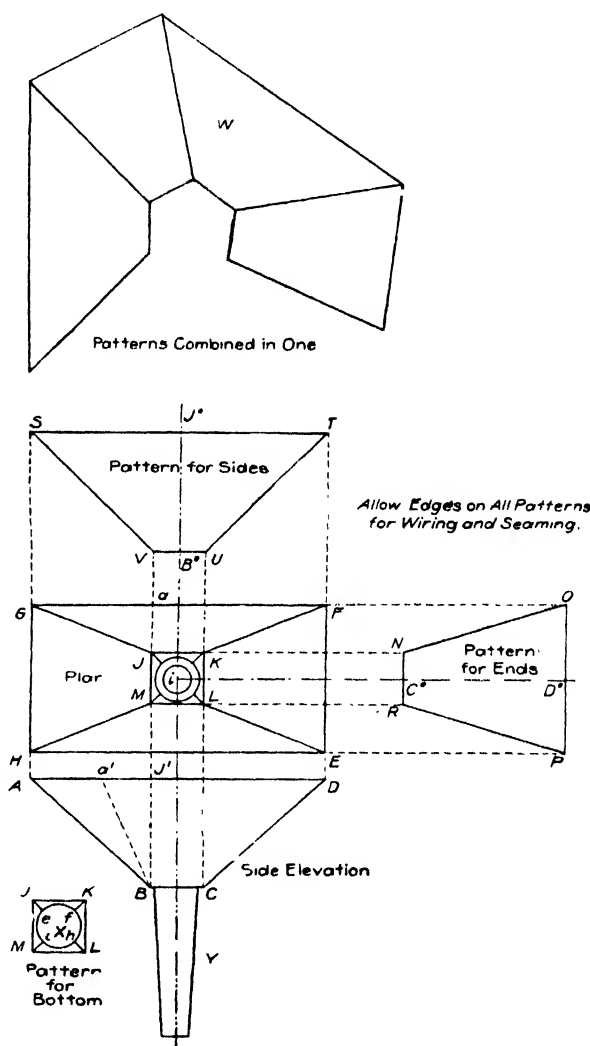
Elevation, Plan and Pattern for a Rectangular to Square Funnel
